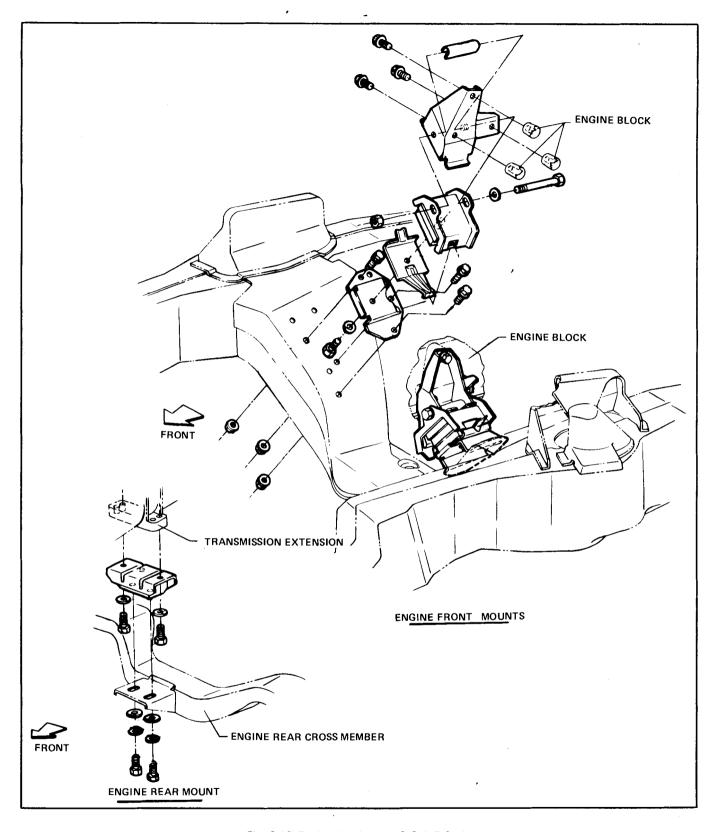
Engine Insulators - 6 Cyl. F Series
